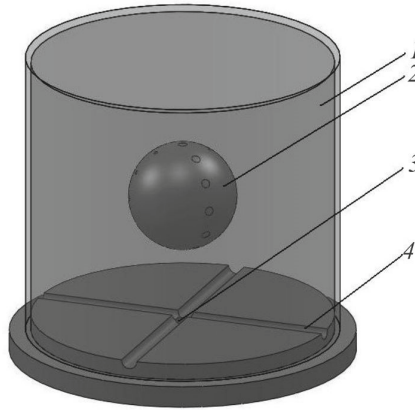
A chamber with a part: 1 is the chamber body; 2 is the part; 3 is a hole for the mixture supply; 4 is a groove.
